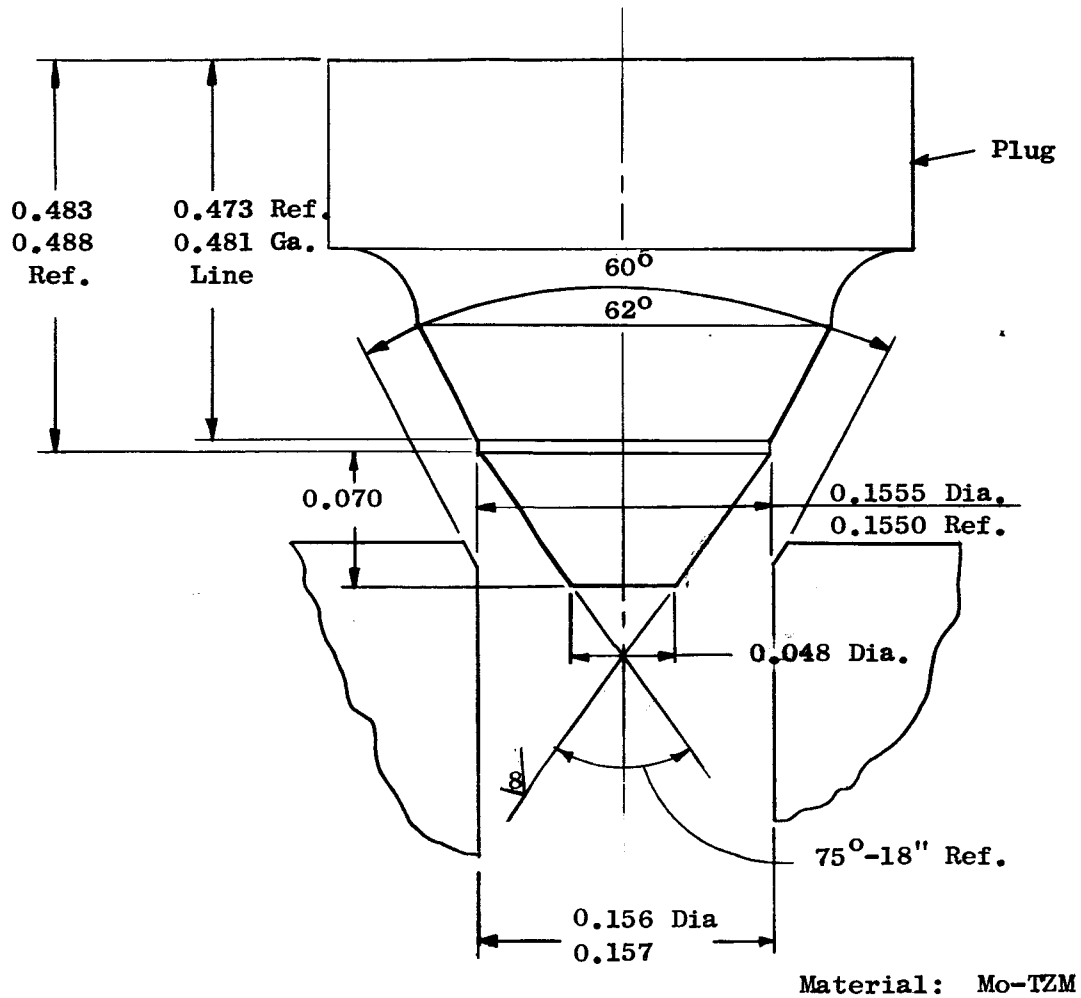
Detail of Metering Valve Plug Body Bore and Port for the Prototype Corrosion Loop.
